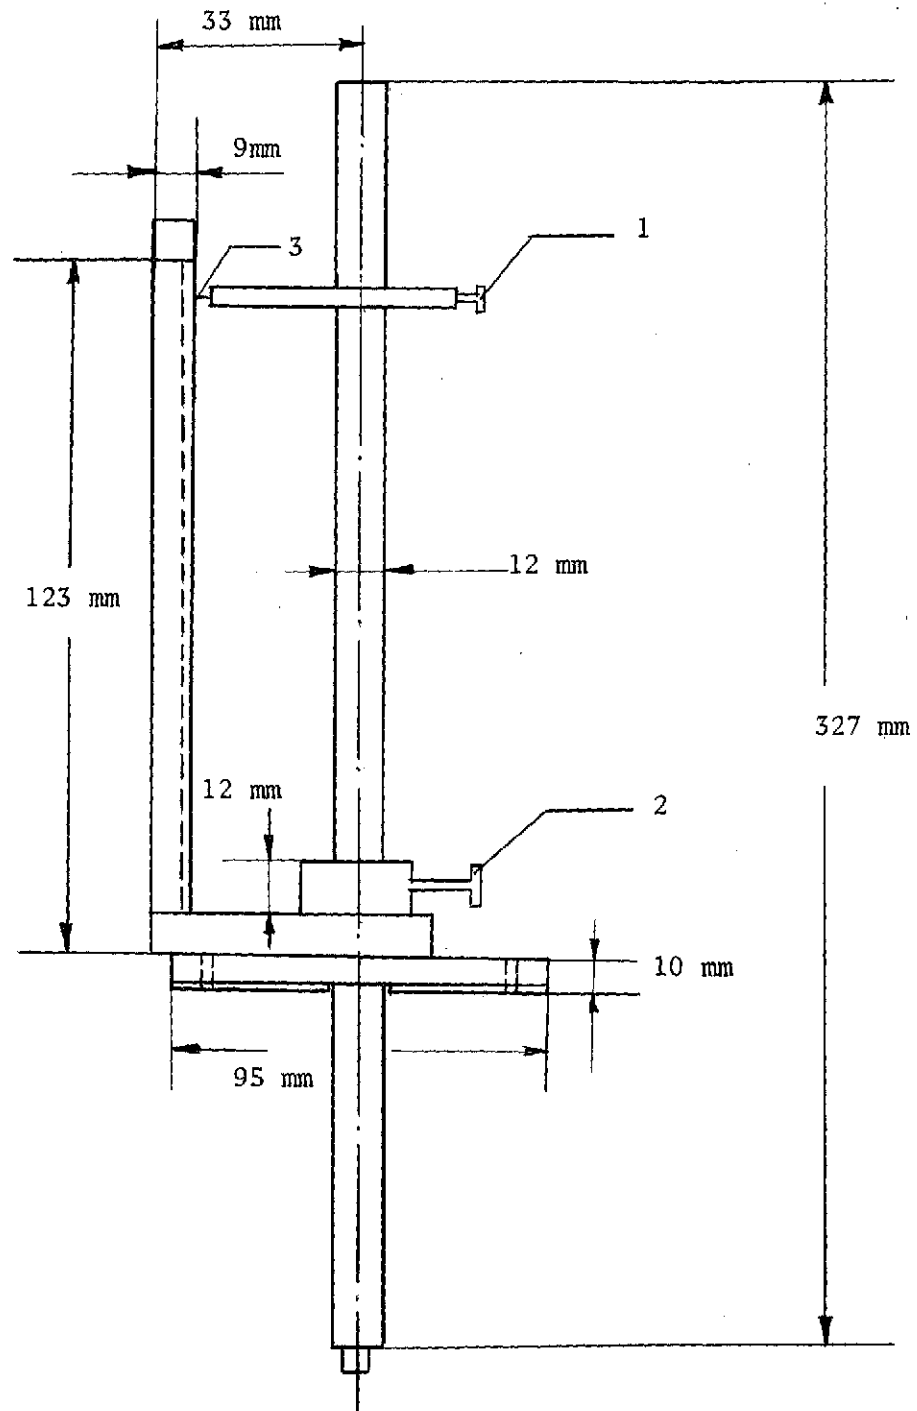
Traversing Mechanism Used for Rotor Wake Measurements.
